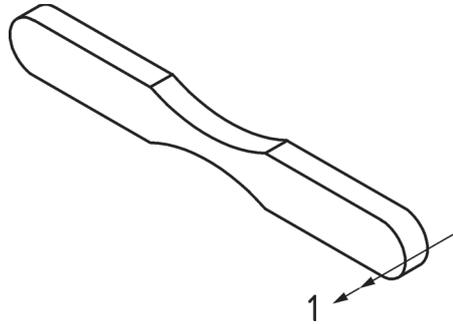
(#) a) shows a drawing of the unnotched test piece. The flatness and parallelism of 0,1 mm are mandatory. The other dimensions are advisory.
